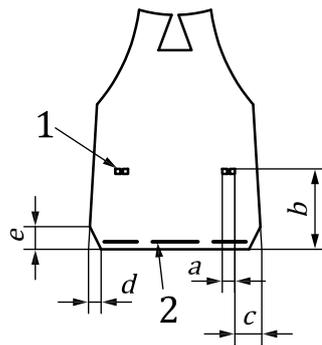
Attachments to front and back cover (dimensions on pattern, before sewing)
